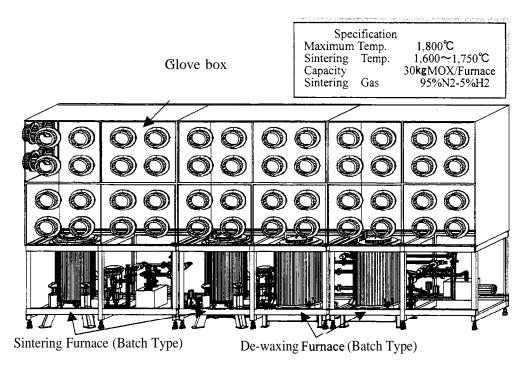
The de-waxing and sintering furnaces for ATR pellet fabrication (Batch type)
